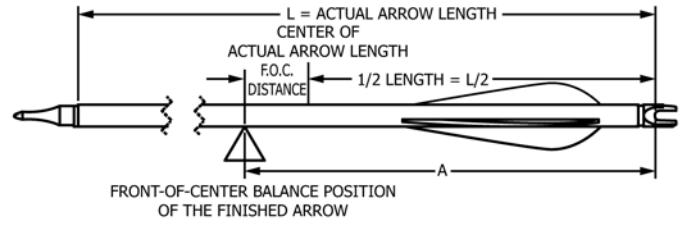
Front-of-Center Balance Position of the Finished Arrow
